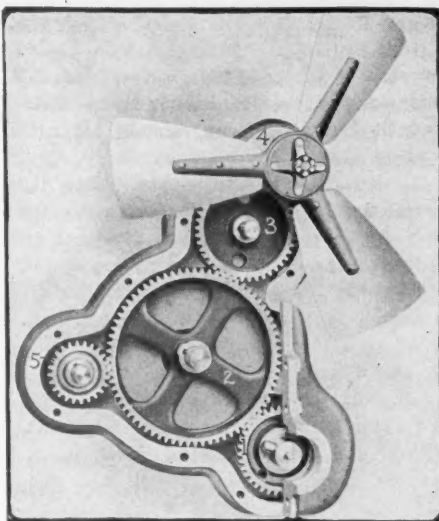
WINTON FAN DRIVE, PINION 1 ON CRANKSHAFT; 2, CAMSHAFT; 3, IDLER; 4, FAN; 5, MAGNETO SHAFT
